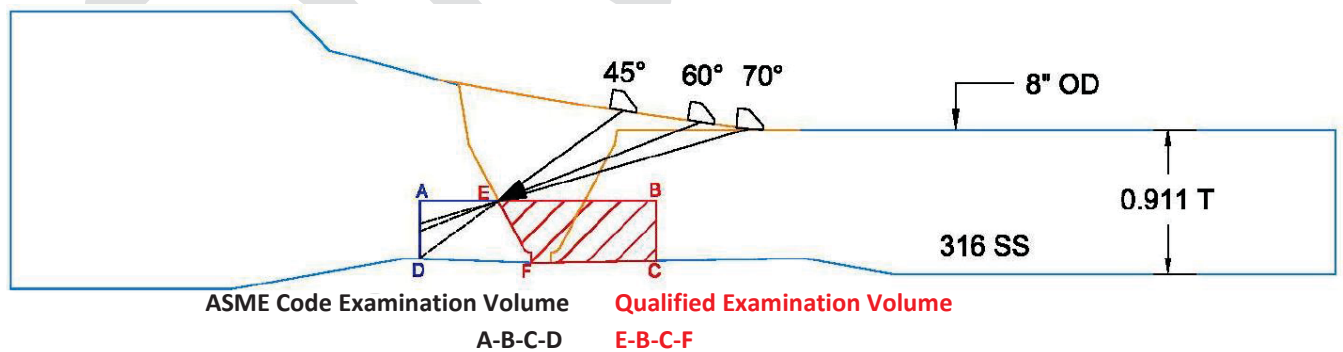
Weld Representing Austenitic Valve to Pipe Welds (Flat) - Alternative Request Qualified Examination Volume for Axially Oriented Flaws
